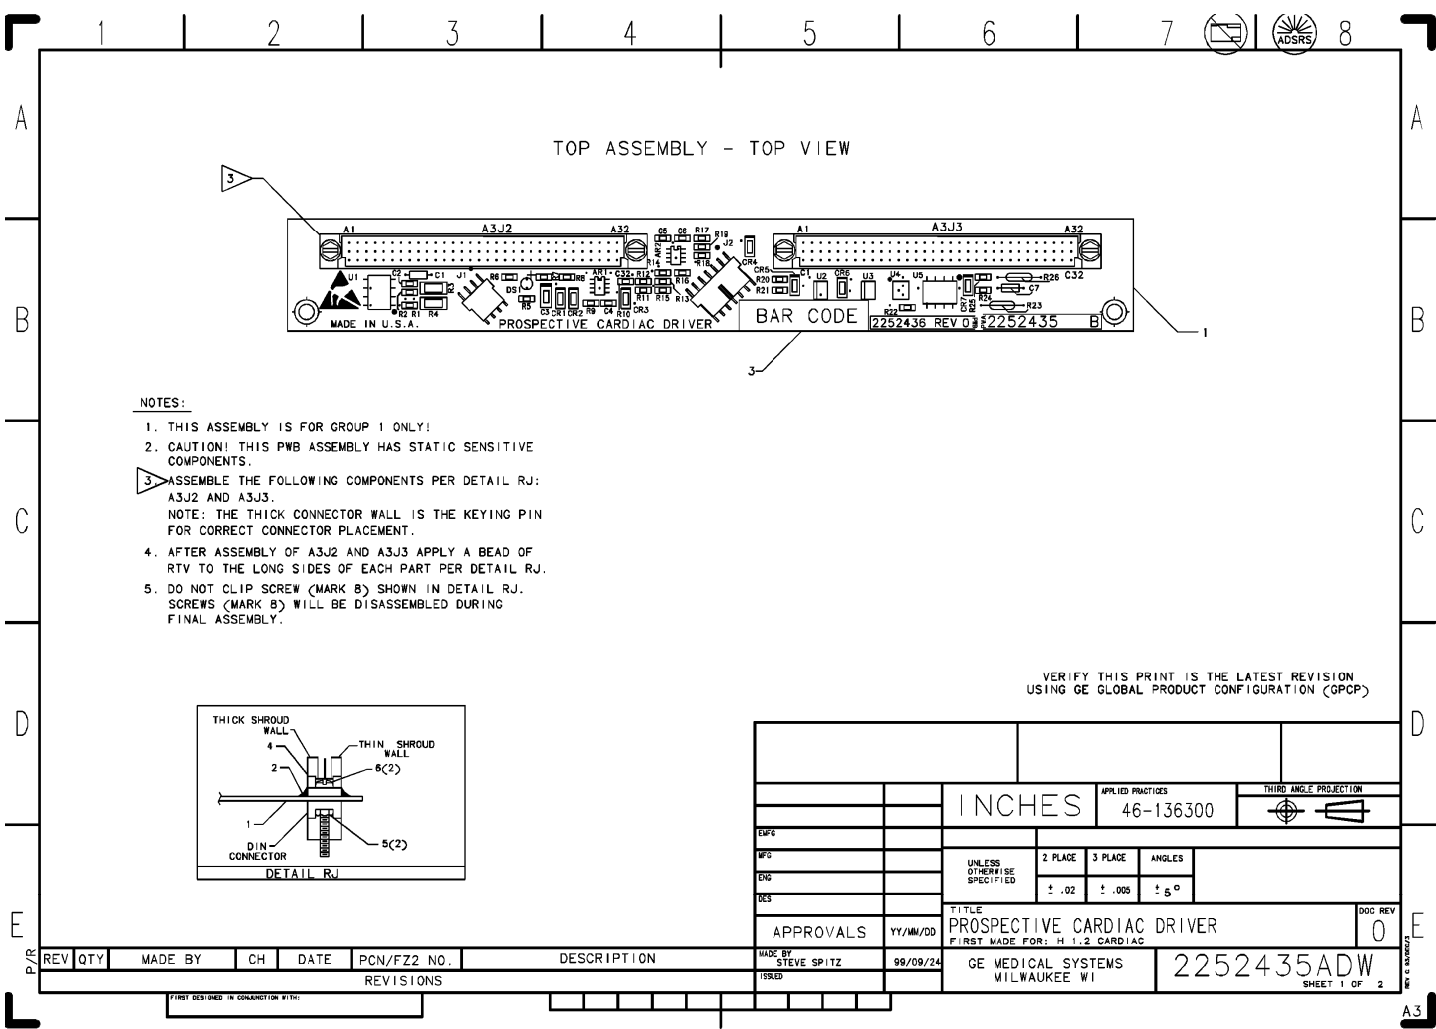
2252435ADW Sheet 1 Rev. 0
